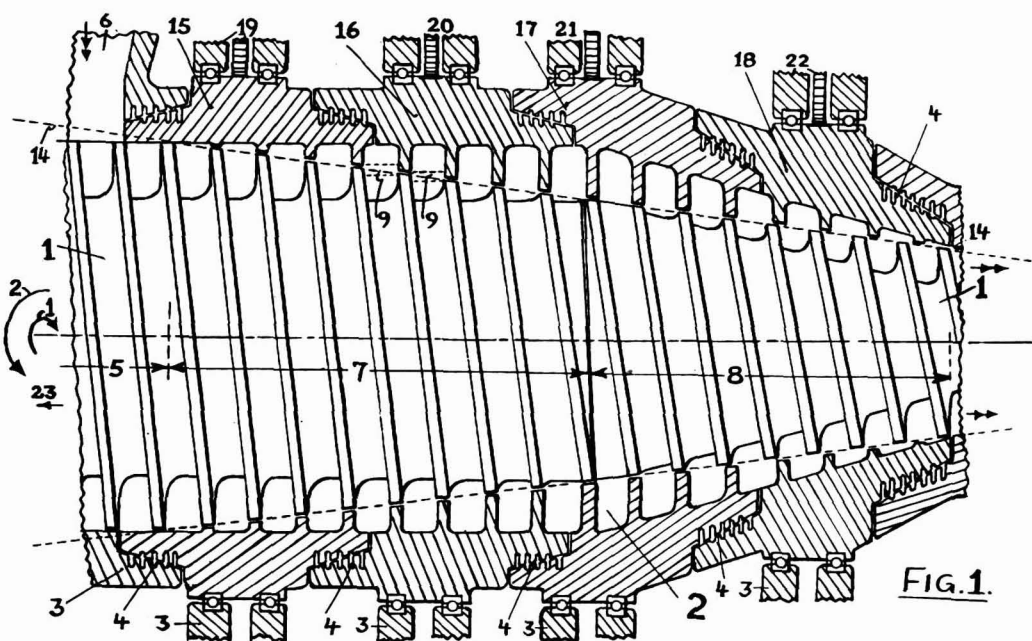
Diagrammatic section of continuous 'enforced order' mixer-extruder with axially adjustable inner screw: 1 Inner screw. 2 Outer screw (opposite thread to inner screw) in four sections. 3 Casing. 4 Gland for sealing joint between casing 3 and outer screw 2 and between sections of outer screw 2. A dynamic gland as in Fig. 10 of Ref. 1 is shown, though for certain purposes other types might be used. 5 Feed-section of inner screw. 6 Entry-funnel. 7 Reducing groove cross-section of inner screw, increasing groove cross-section of outer screw, material-transfer from inner screw as giver to outer screw as taker. 8 Increasing groove cross-section of inner screw, complementary reducing cross-section of outer, material-transfer from outer screw as giver to inner as taker. 7 and 8 combined make one mixing-cycle. 9 Zone of intense mixing (shear-mixing in three mutually normal planes) between
